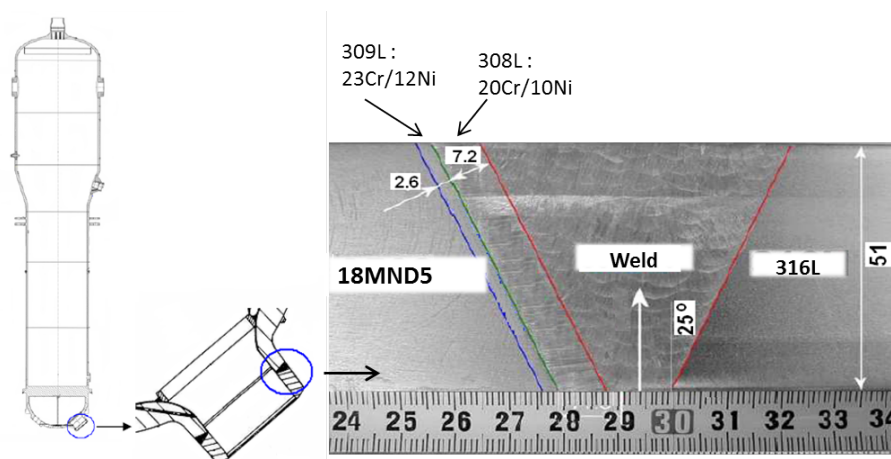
Geometry and constituents of a dissimilar steel weld in the case of a steam generator.
